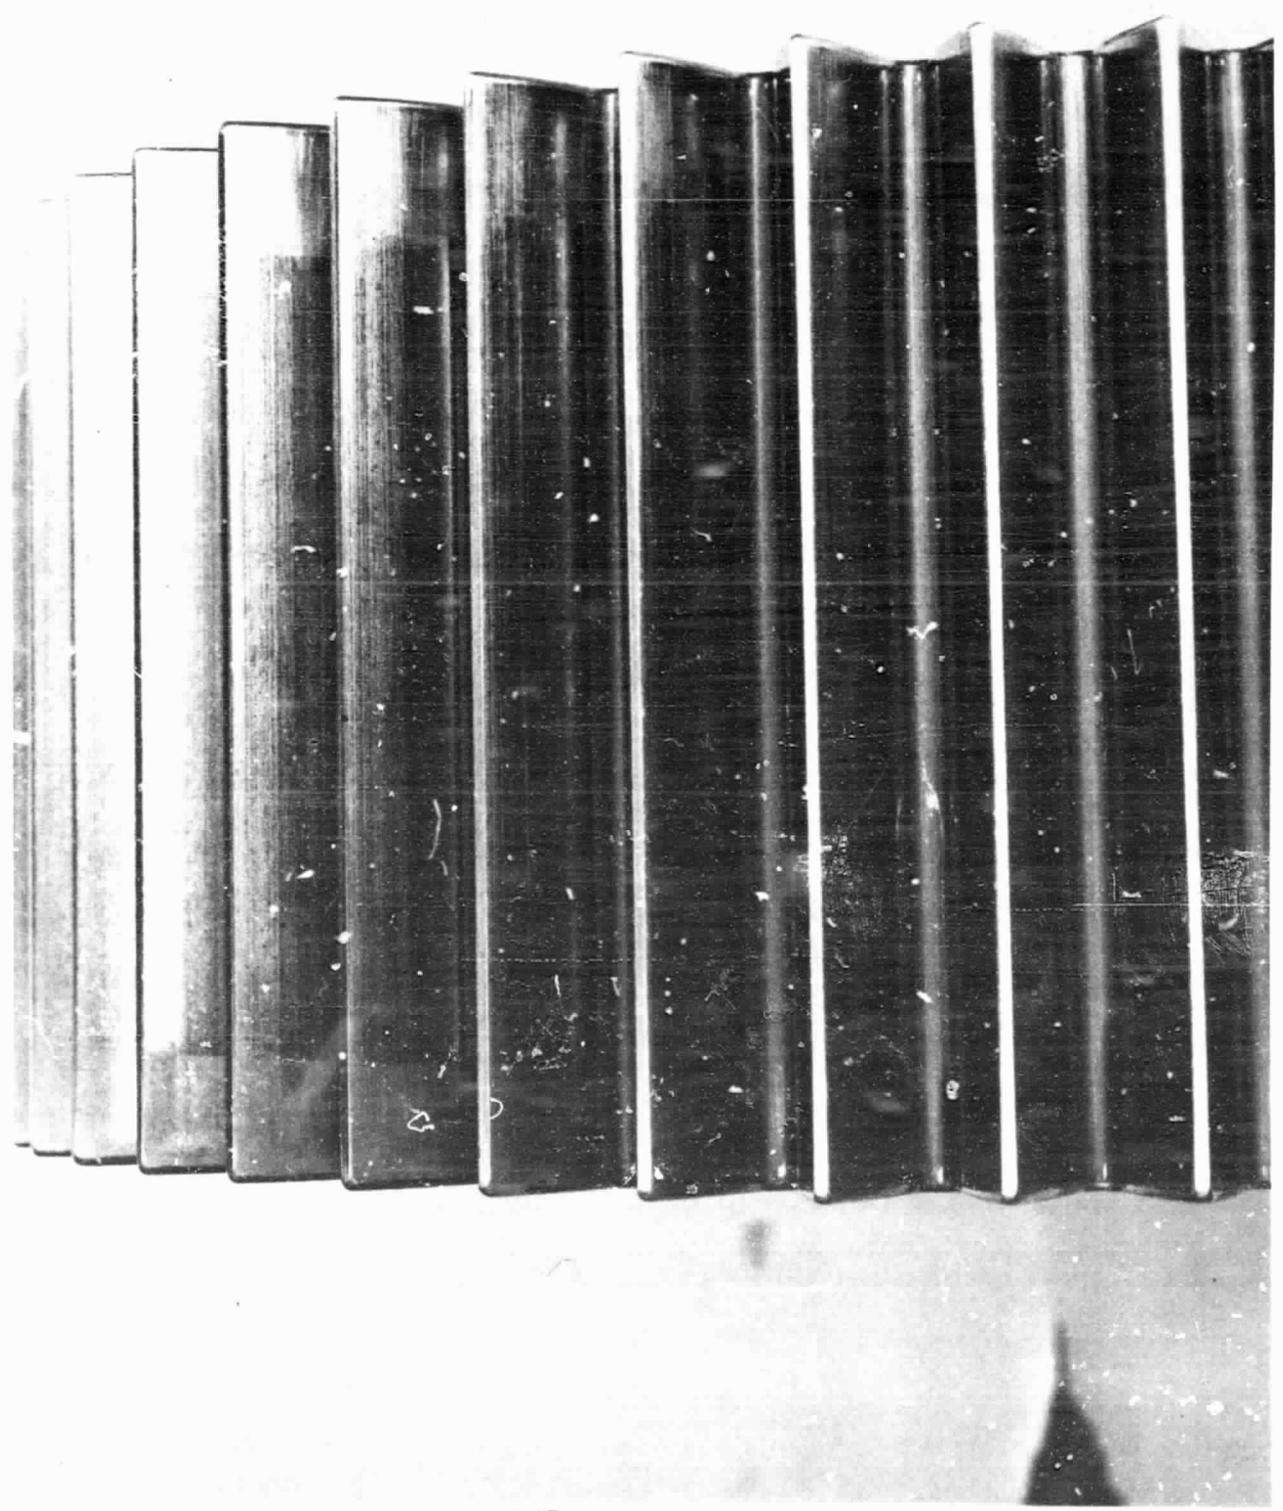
SECOND STAGE PLANET TOOTH SURFACES - RING GEAR CONTACT
